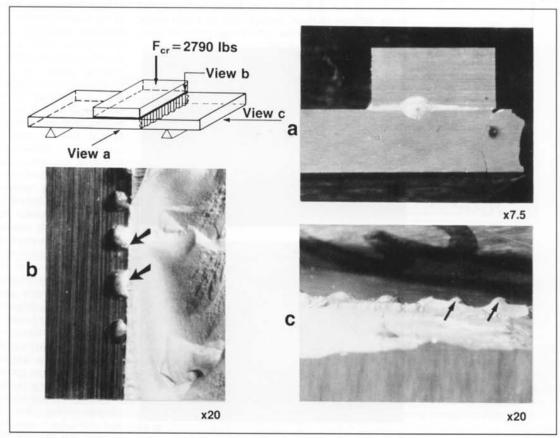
The fracture face of the K68 joint brazed with METGLAS MBF-1011 filler metal. The brazement was produced with a large brazing gap and excessive fillets. Fracture starts in the excessive drops of the filler metal, which form a part of the large fillet, and proceeds in a brittle mode. Low critical fracture force: cracks are inclined 45° to the brazement plane.
